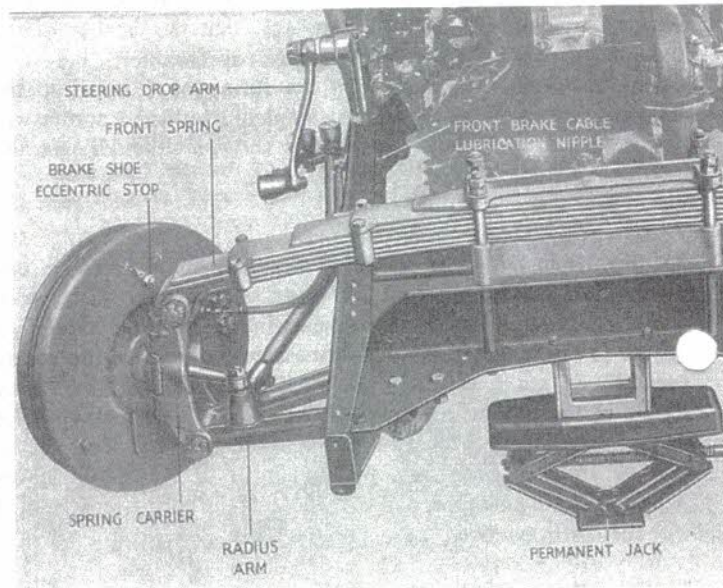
THE LAYOUT OF THE FRONT SPRING. Showing the eccentric stop for setting the brake shoes, in relation to the drums, and indicating also the position of the front brake cable lubrication nipple and of the permanent jack.
